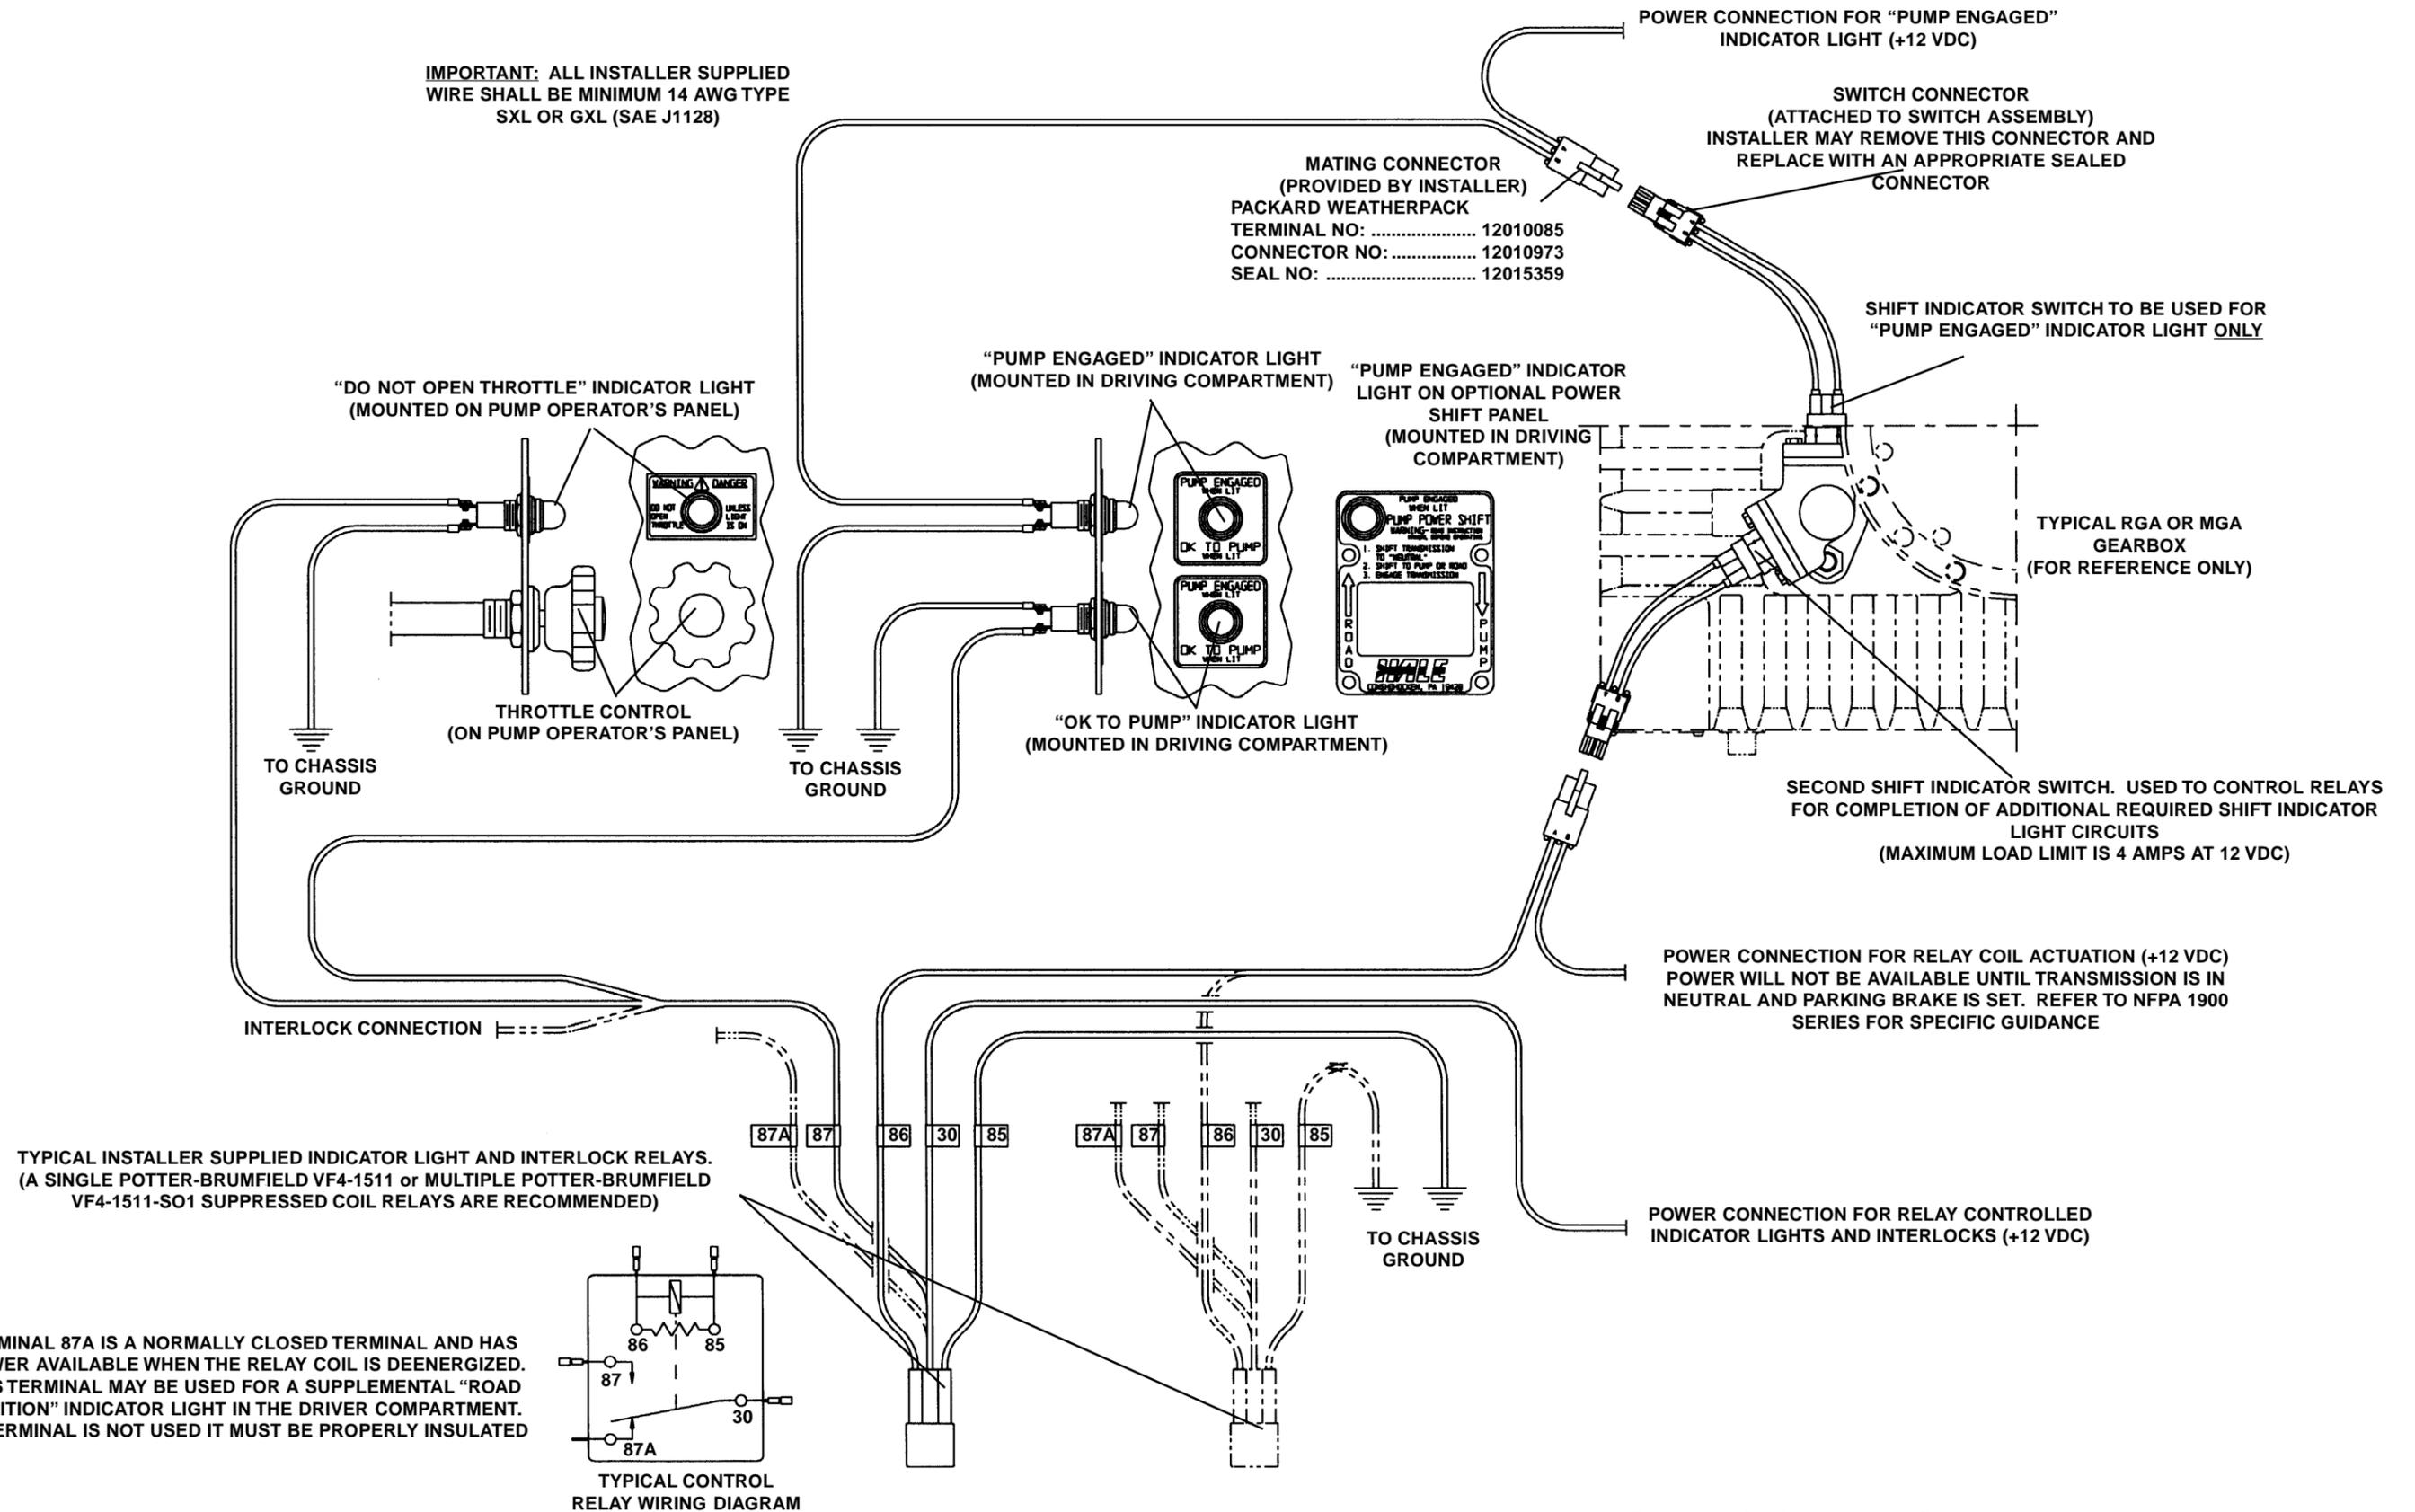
Typical Gearbox Shift Indicator Switch Wiring Diagram
